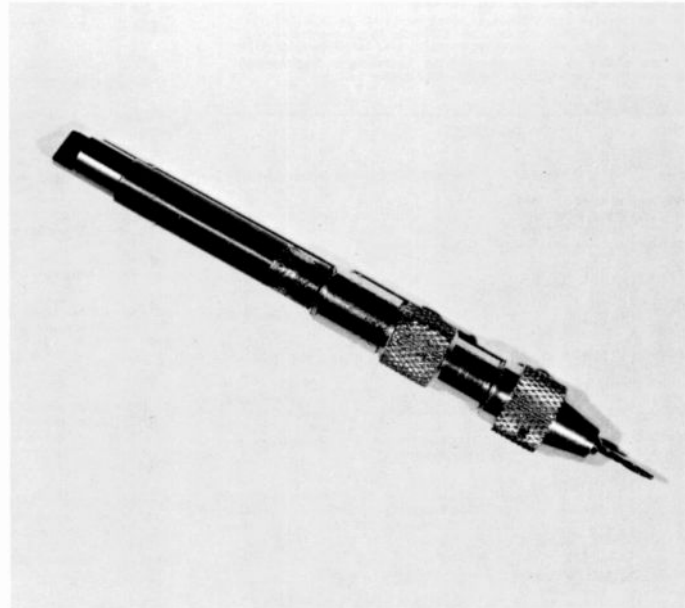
Drill-chuck accessory for a typical wire-wrap tool.
